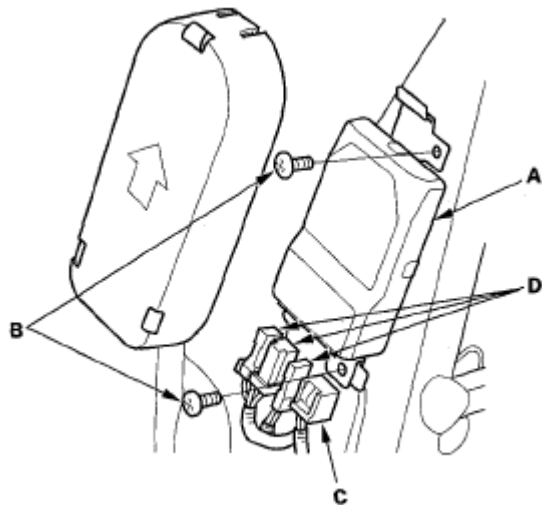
Identifying ODS Unit, ODS Unit Harness 18P Connector And Sensor Connectors
